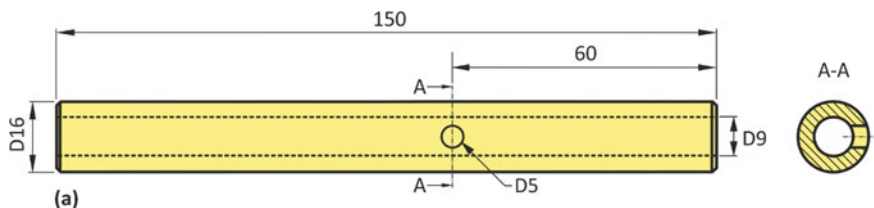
Tubular specimen with a transversal circular hole fabricated via selective laser melting from 18Ni300 steel utilised in the multiaxial bending-torsion fatigue tests. Dimensions in millimetres
